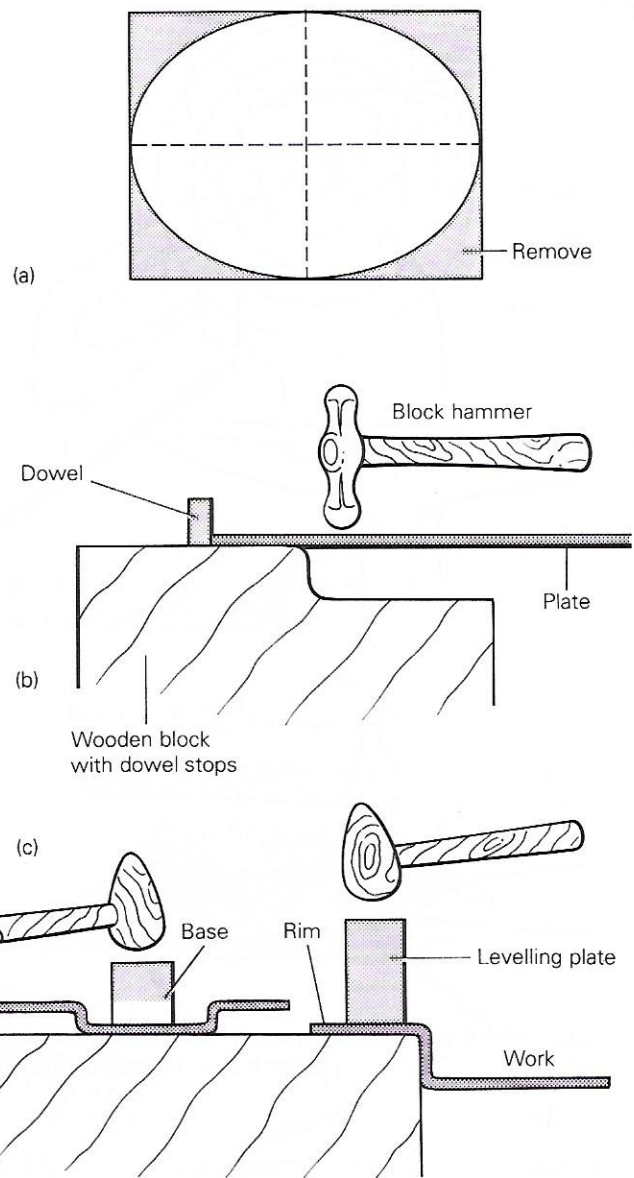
Sinking. (a) Cut to shape and size. (b) Place blank on the block; hammer using block hammer. (c) Flatten rim and base.
